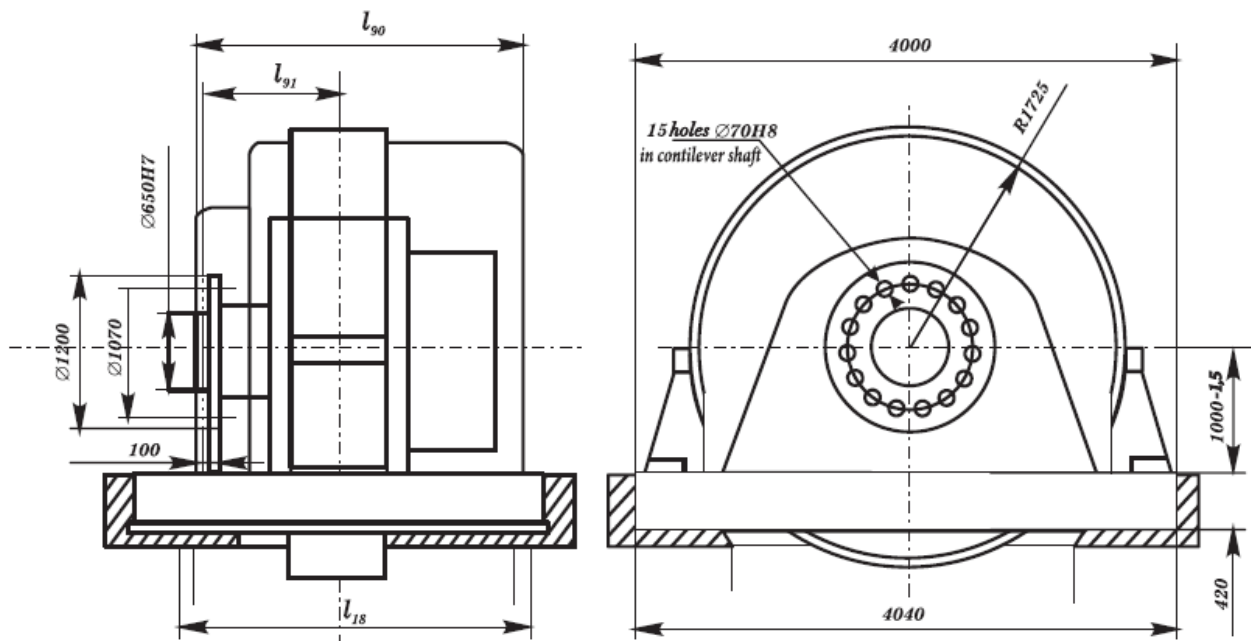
Overall and mounting dimensions and weight of motors with height of rotation axis 1000 mm (cantilever design).
